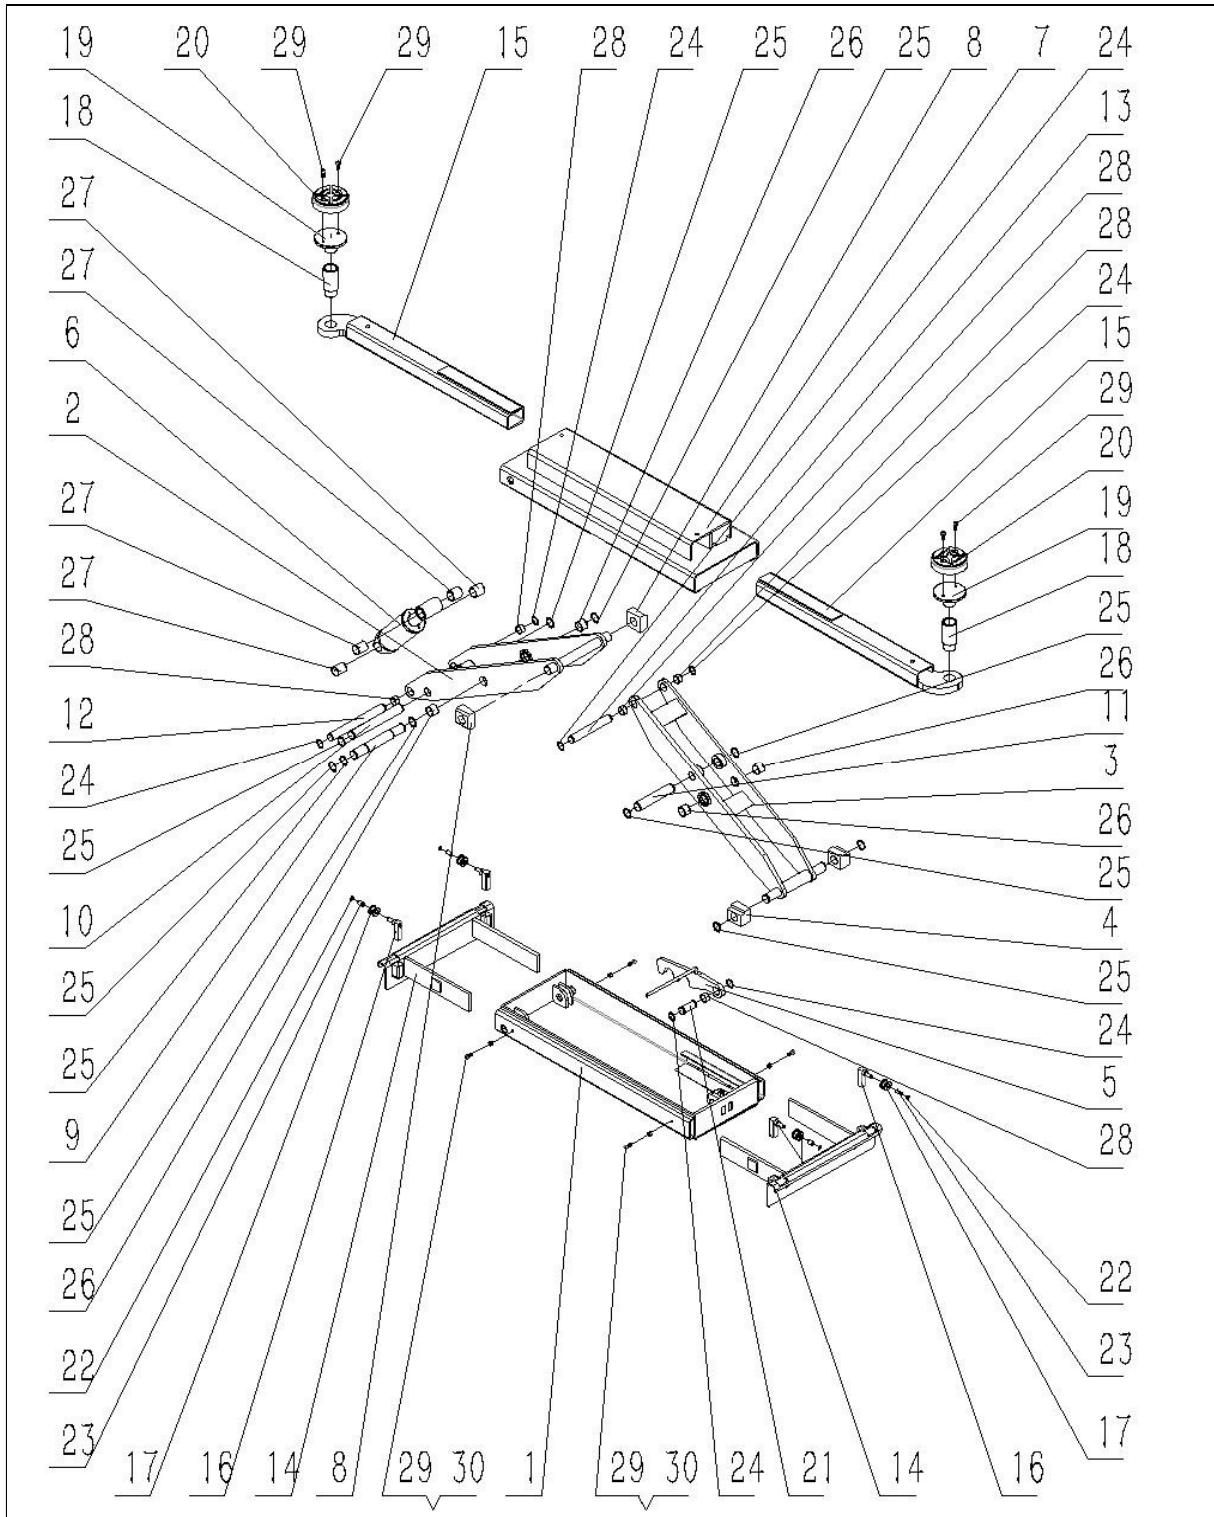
Exploded view of the Secondary Lift Rolling Jack
